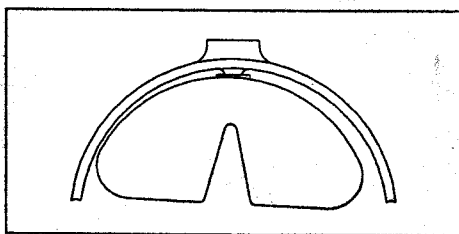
Misalignment of cover plate of electrical reed vibrator with inside diameter of Proving Ring.
